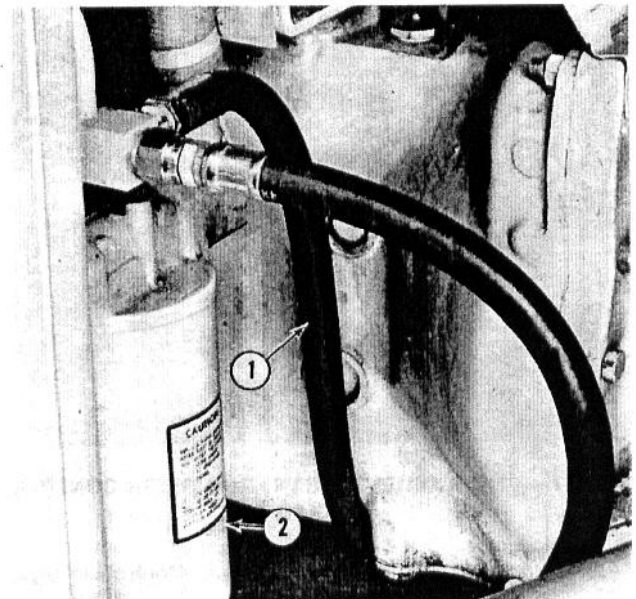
LIFT CYLINDER HEAD-END HOSE RE-ROUTED BENEATH TRANSMISSION CASE
